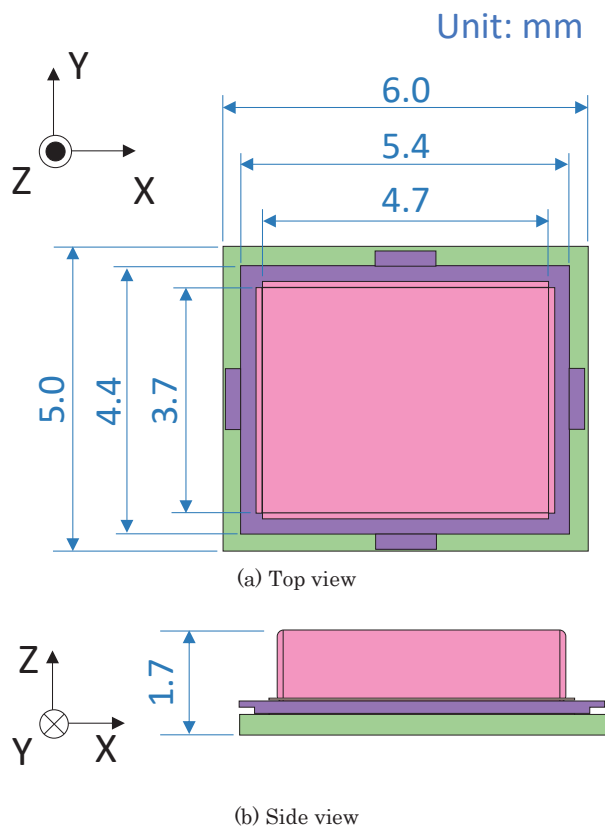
Cross-sectional view of prototype of magnetic shielded package
